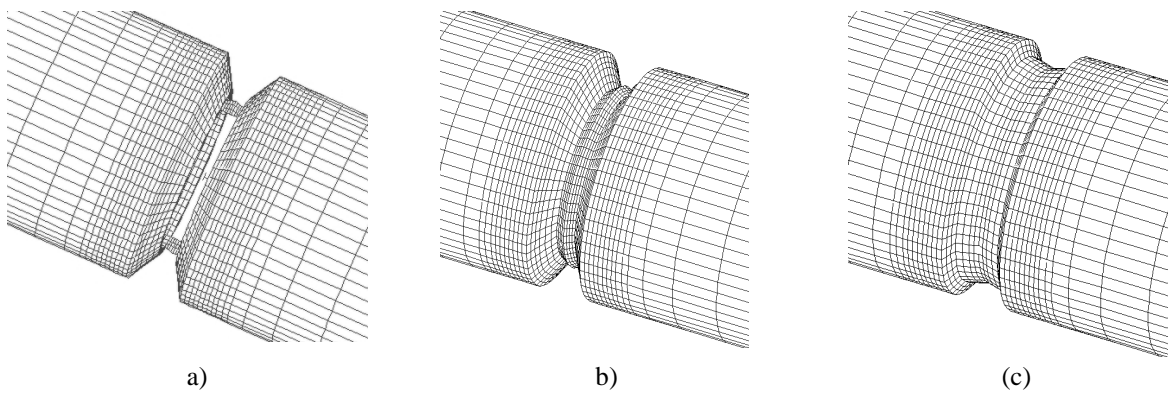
3D-model of pipes with activated welds, a) weld spots, b) root welds, c) intermediate welds
